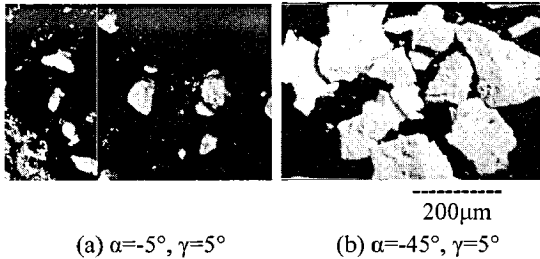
Shapes of chips in turning with tungsten carbide tools of different tool geometry (workpiece: presintered at 800°C, V=60m/min, f=0.1mm/rev., t=0.5mm, T=1min)
